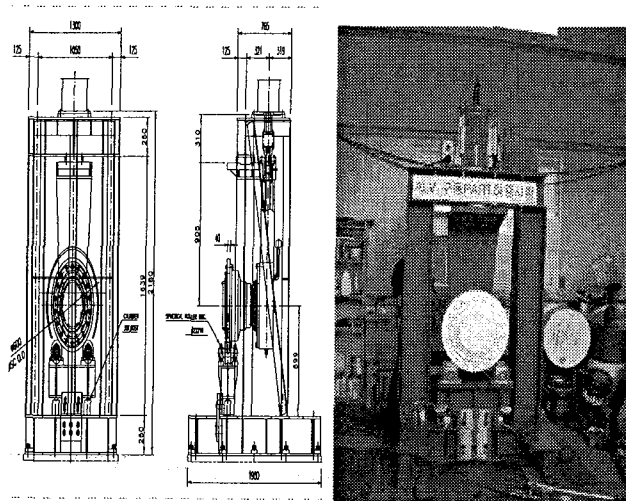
An Assembly Drawing of Test Jig & Fixture
